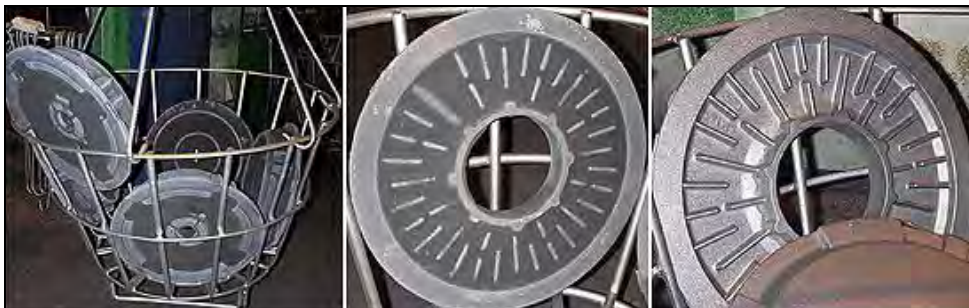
Castings before (l., m.) and after (r.) sand removal by blasting [237, HUT, 2003]
